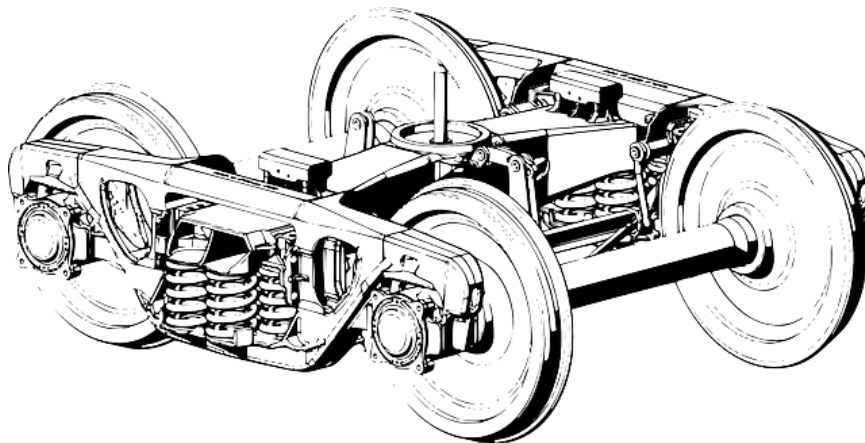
Three piece bogie with a flat center plate on the bolster [18]
